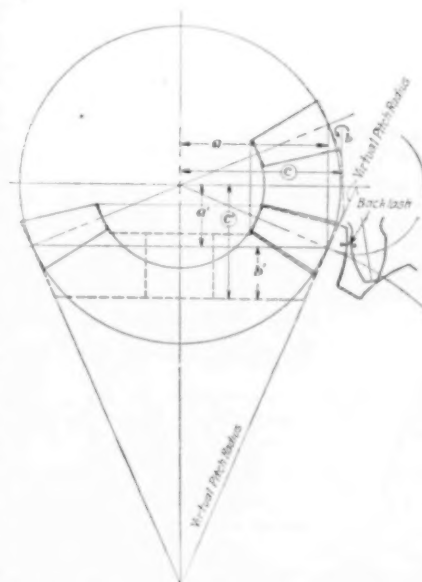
THEORETICAL CONSTRUCTION OF BEVEL GEAR, WITH CONVENTIONAL LAYOUT SHOWN IN DOTTED LINES
